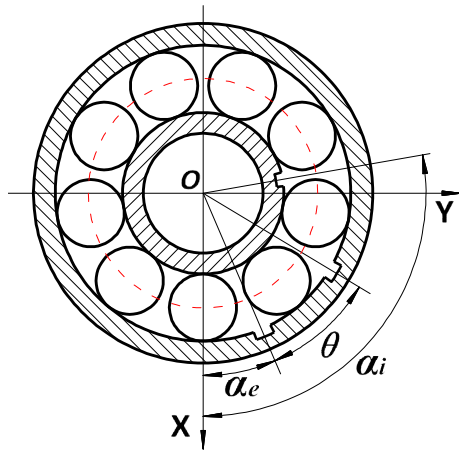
Schematic diagram of bearing with surface defects.
